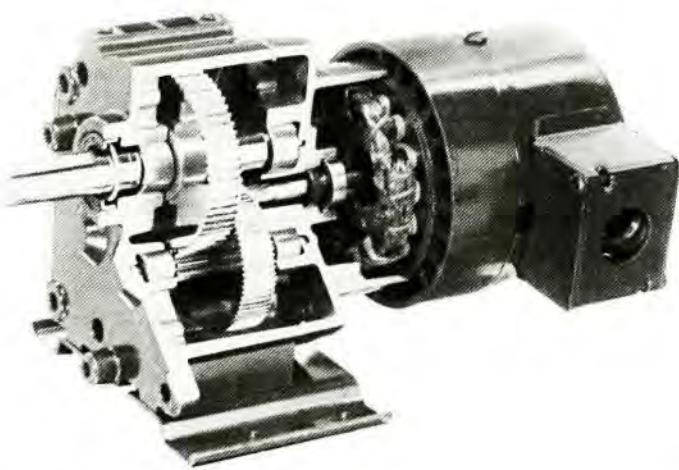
Double-reduction spur gear reducer (Bison Gear & Engineering Corporation, Downers Grove, IL)
